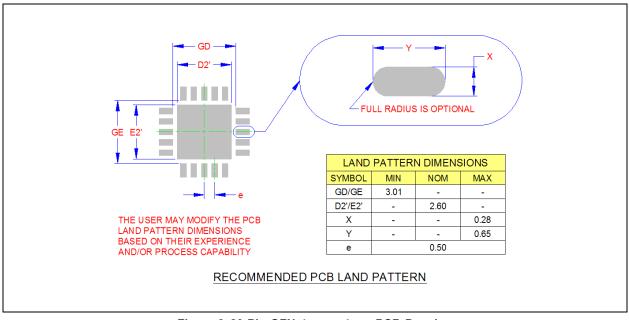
20-Pin QFN 4mm x 4mm PCB Drawing
